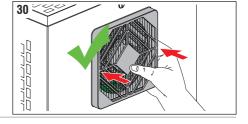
Reassemble the filter cover with the snap fastening. Press it onto the bottom of the device until the parts are locked in place.
